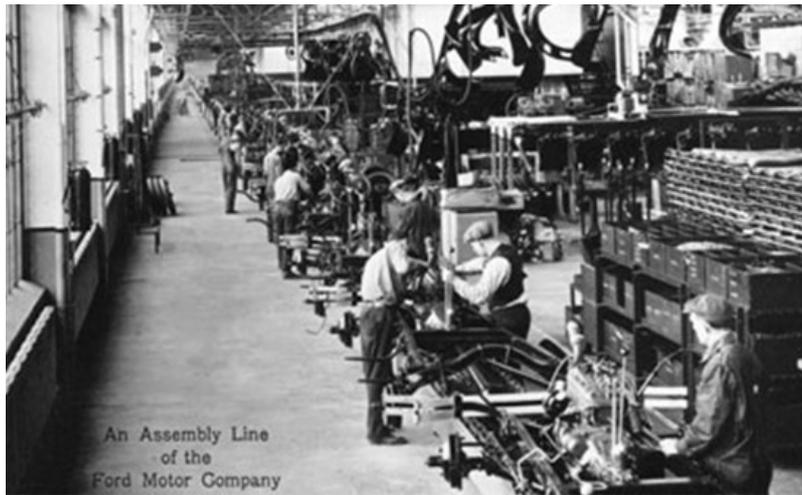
Assembly Line at Ford Motor Co. (source : www.corporate.ford.com)
